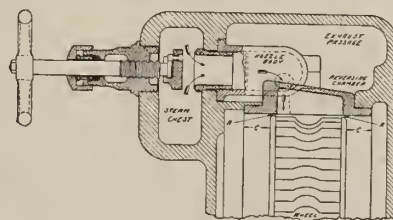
DIAGRAM SHOWING WHEEL CLEARANCES
